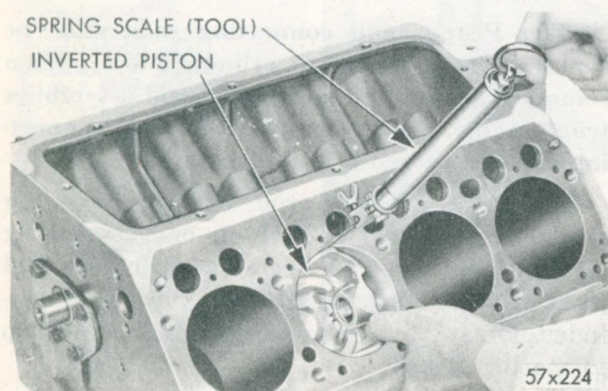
Fitting Piston to Cylinder Bore (FirePower)
